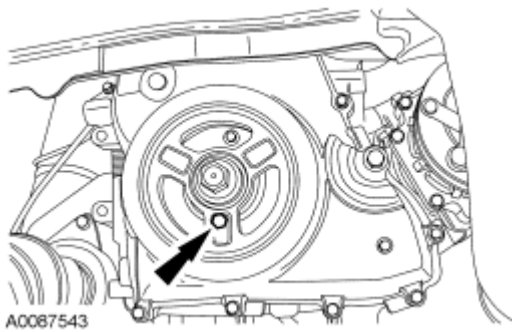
Aligning Crankshaft Pulley Bolt Holes
